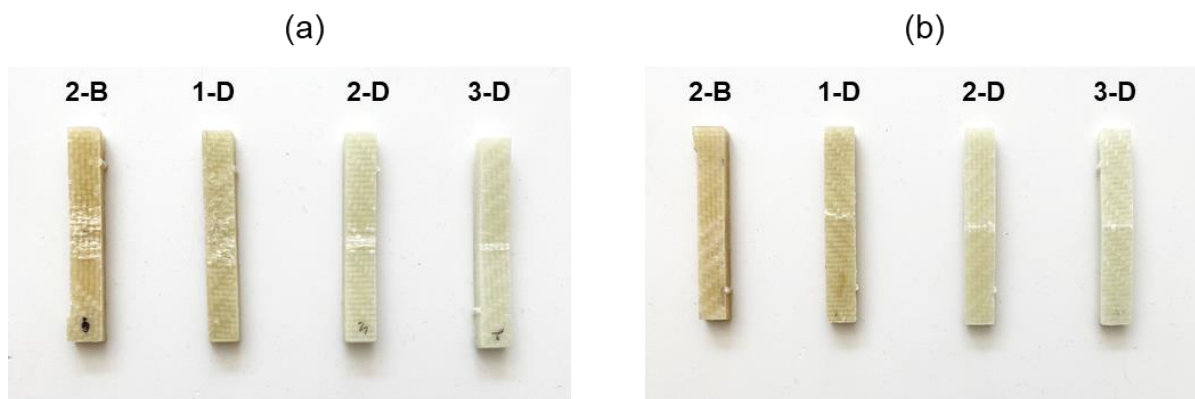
Specimens of 20 PLCL/GF composites after three point bending test. View from (a) central loading member and (b) opposite to loading member.
